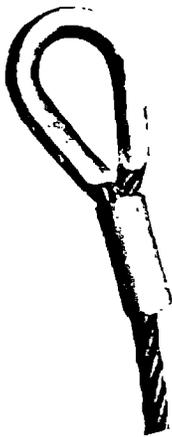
Turn Back Loop with Sleeve and Thimble WRT After Pressing Sleeve.
